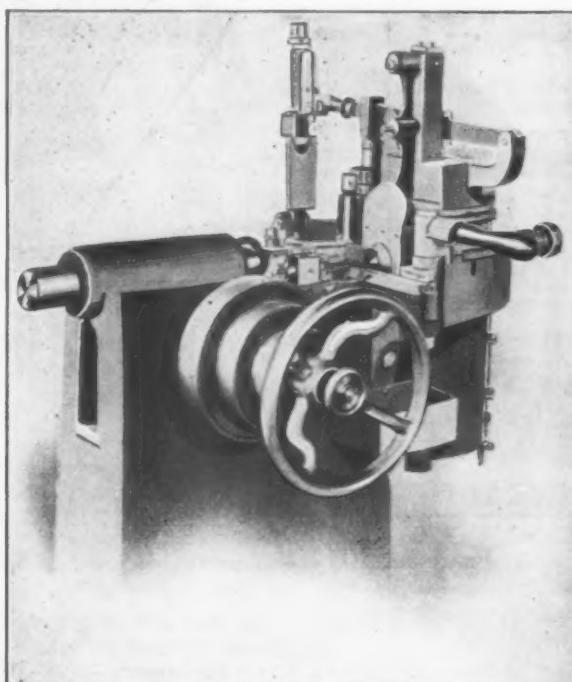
Machine Open for the Insertion of the Interchangeable Parts for a New Character.
